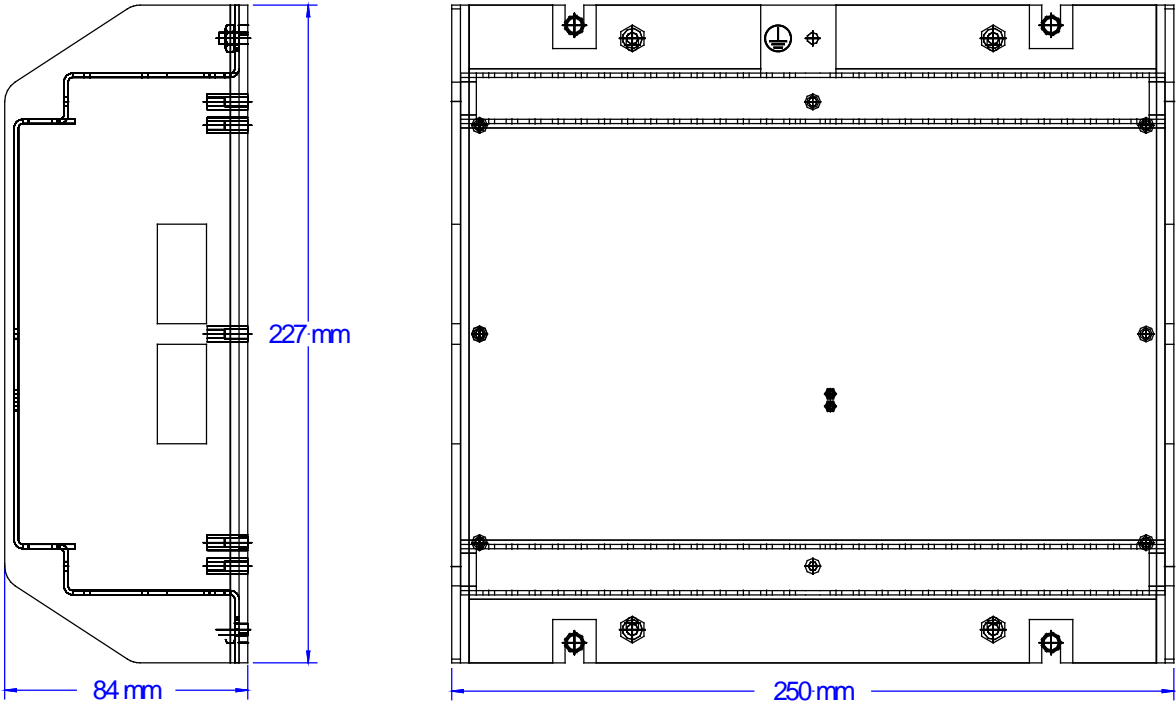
Sheet metal housing easYgen-3100 - dimensions
